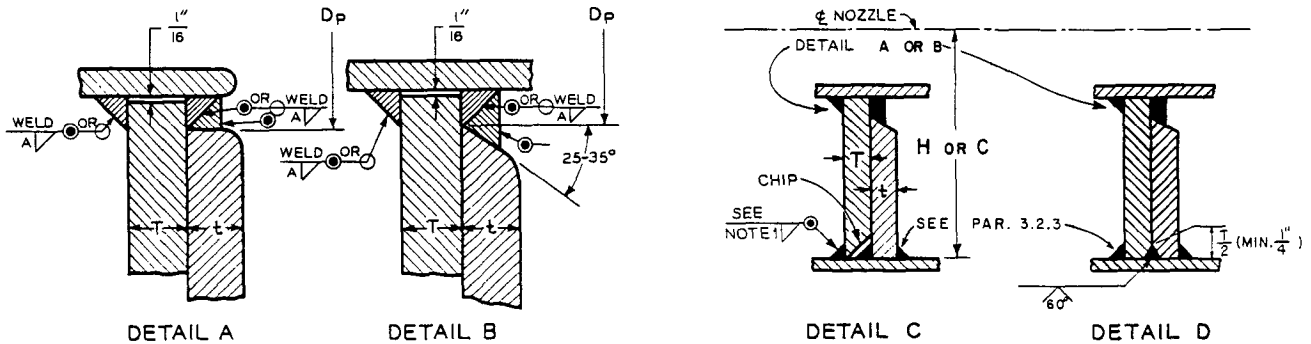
Shell Nozzles (See Tables 3-6, 3-7, and 3-8).
